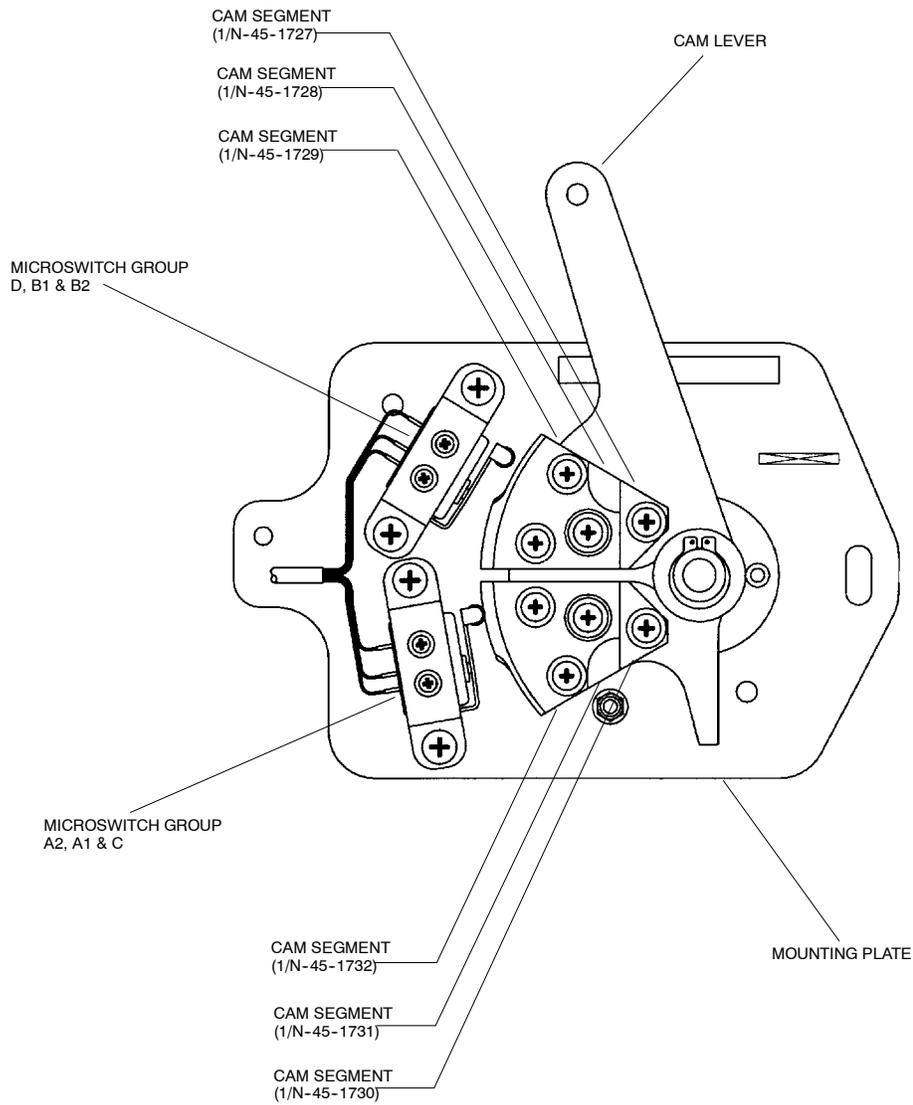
Cam/Microswitch Assembly (Mod N835)
